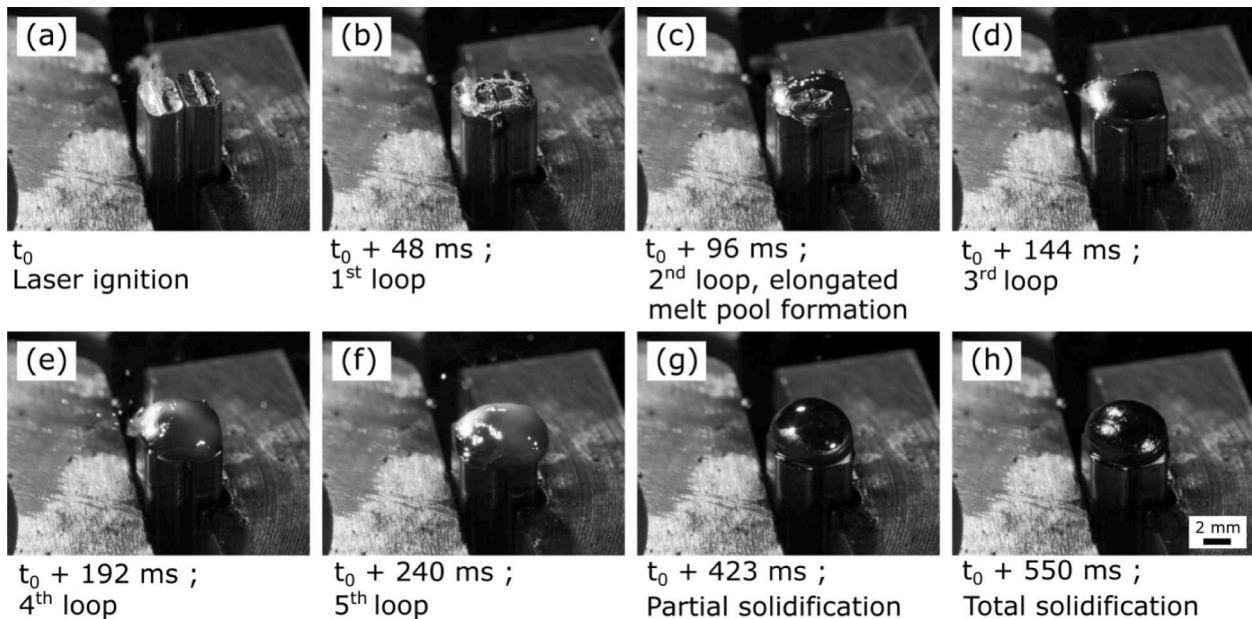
Critical time instances showing the formation of the weld bead during the laser welding of hairpins with the Mid-NIR-215 system.
